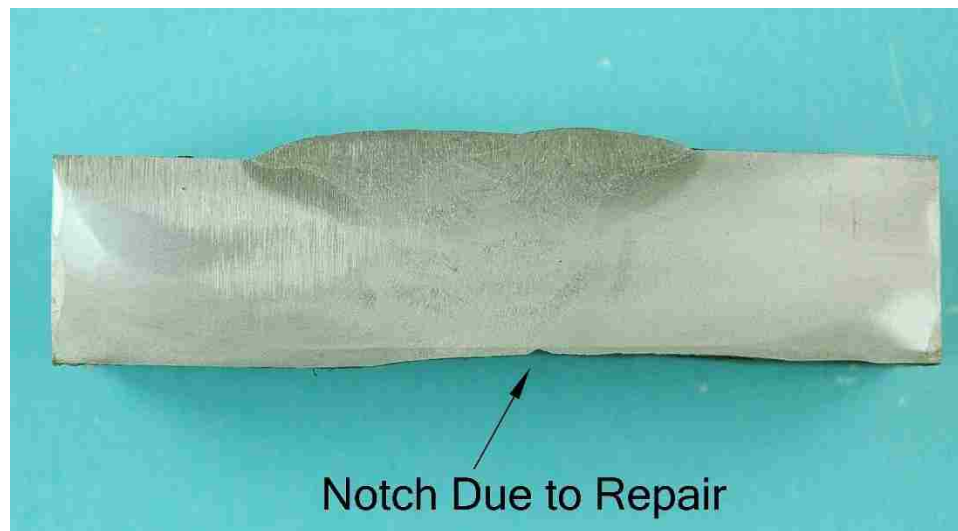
Weld root section 6 of CJP deck weld
